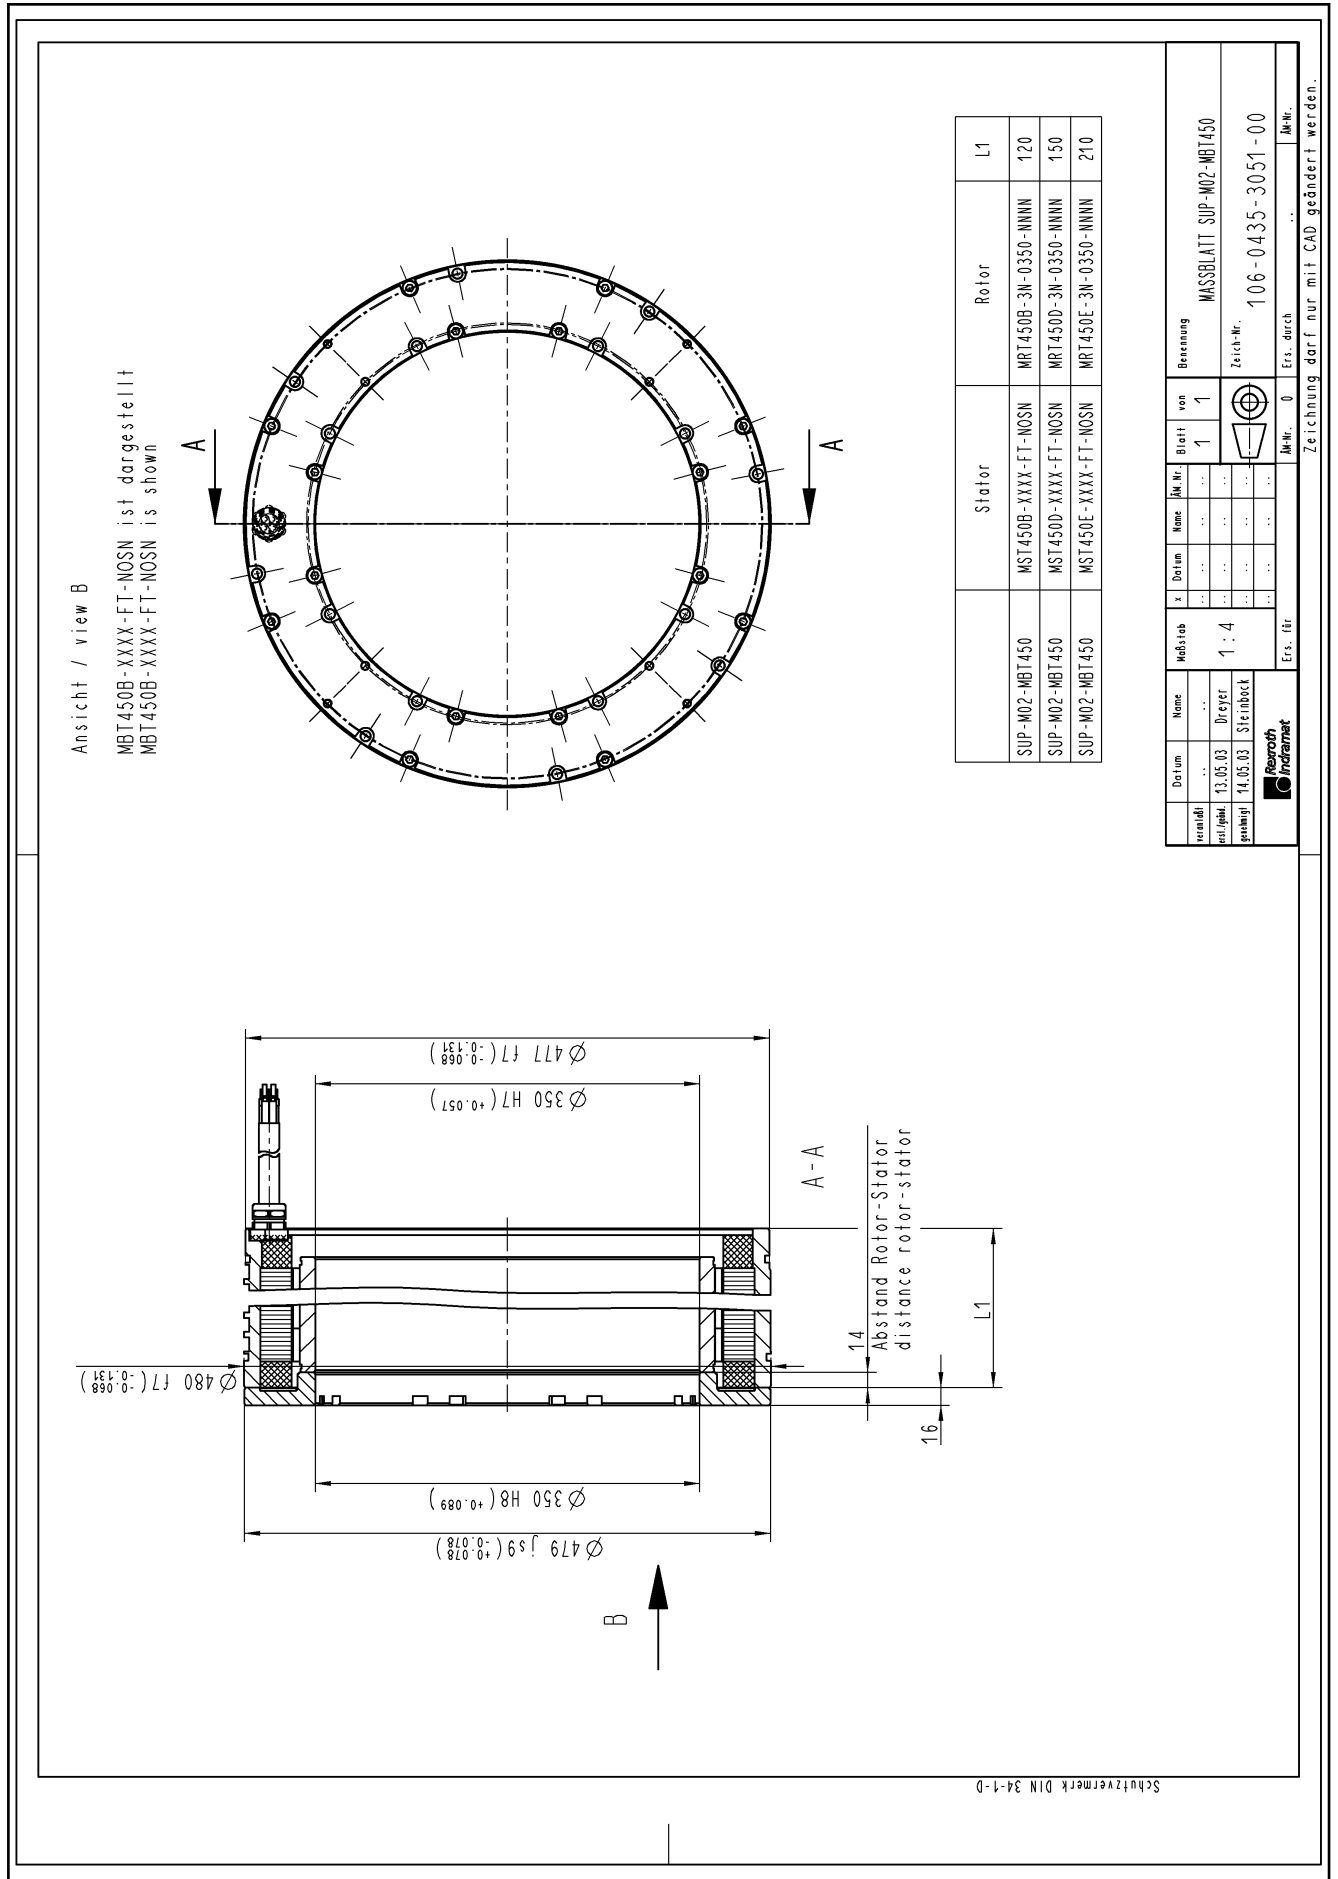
Dimension sheet for mounting ring in SUP-M02-MBT450
